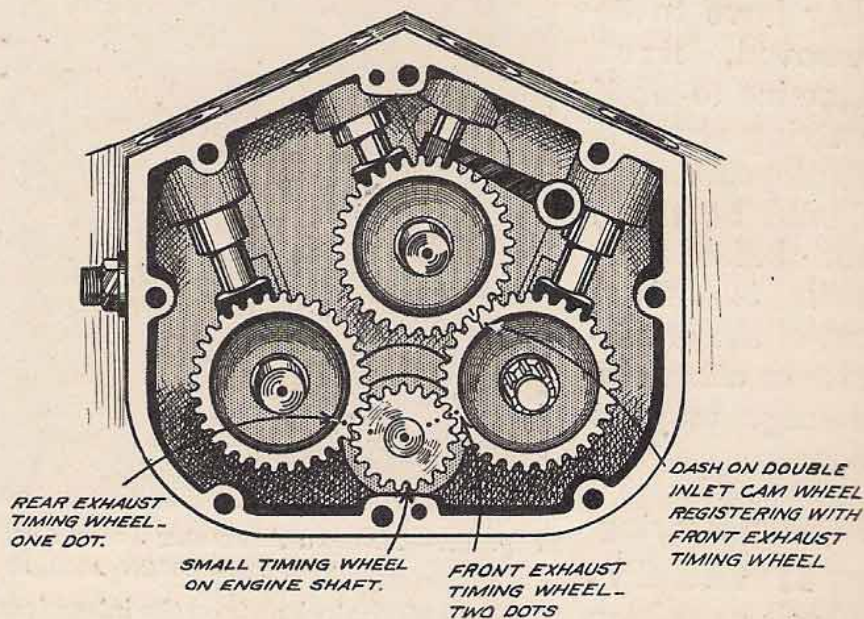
A.—TIMING-WHEEL SETTING ON TWIN-CYLINDER ENGINES.
